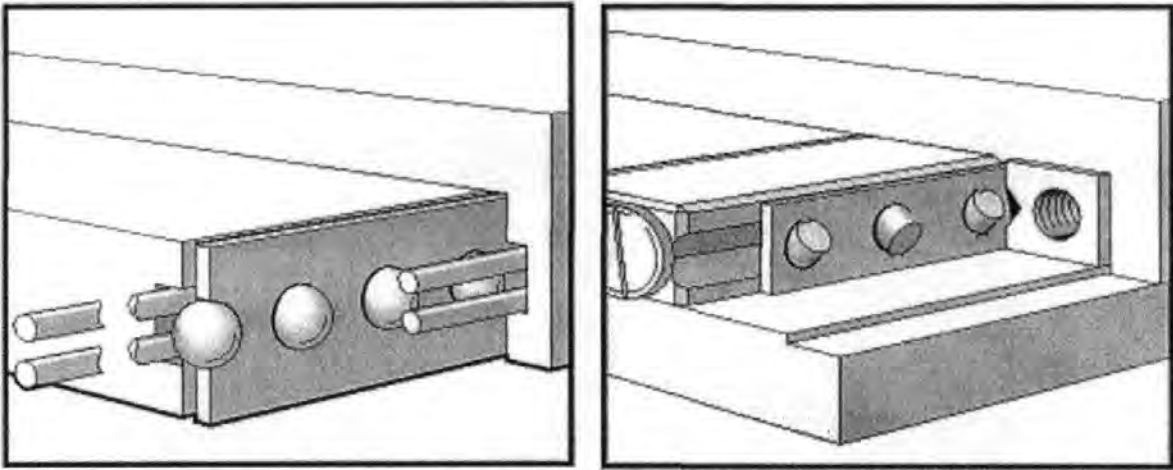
Slide Rail Arrangements, Ball Bearings (left) and Crossed Roller (right)⁴
